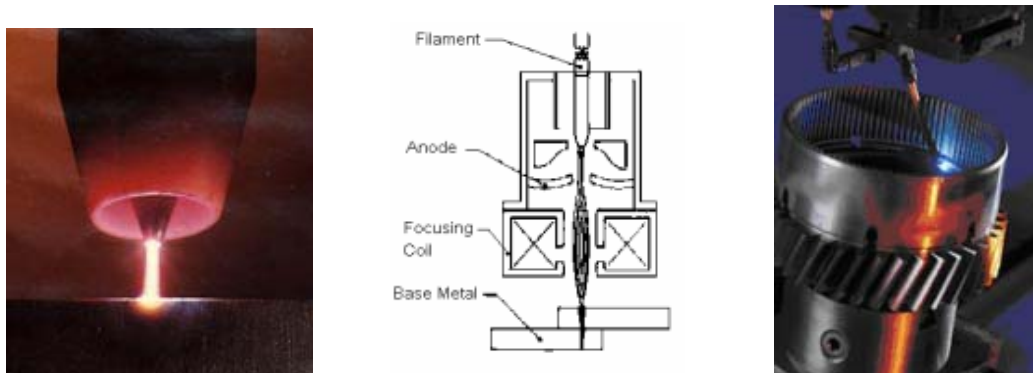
(a) Plasma arc welding (b) Electron Beam Gun making a lap weld (c) Laser welding of a gear
